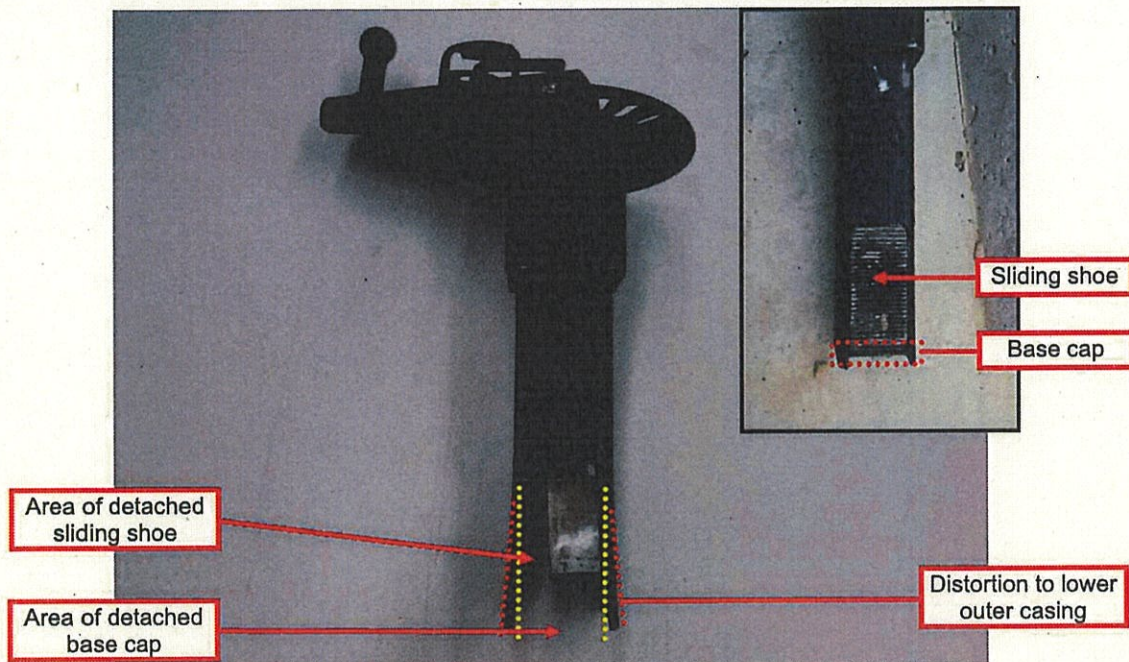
Failed clamp assembly showing distorted outer casing<sup>1</sup>
